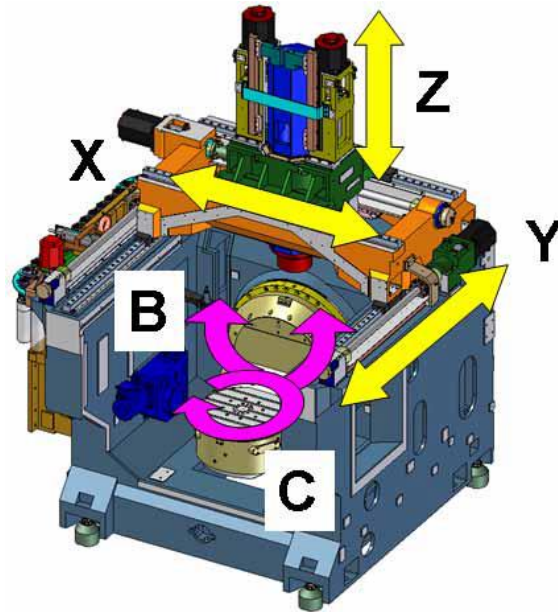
Structure of the 5-axis machining center NMV5000 DCG [90].
